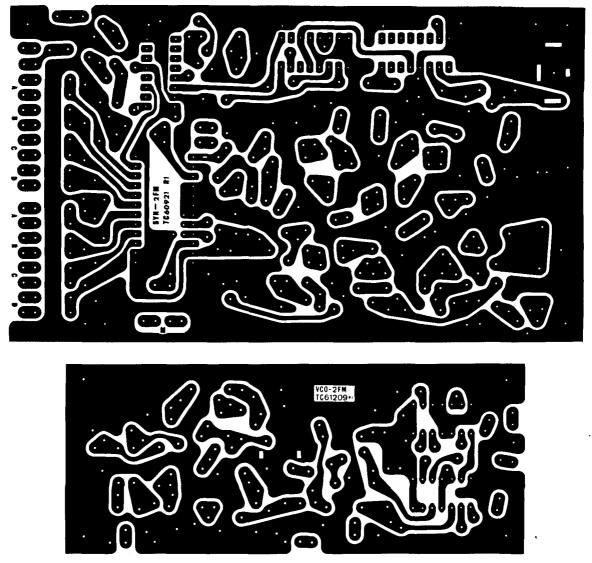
Foil pattern for the synthesizer board (above) and the VCO board (below).
